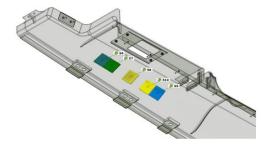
Specimens made outside the crack formation zone – control specimens.
